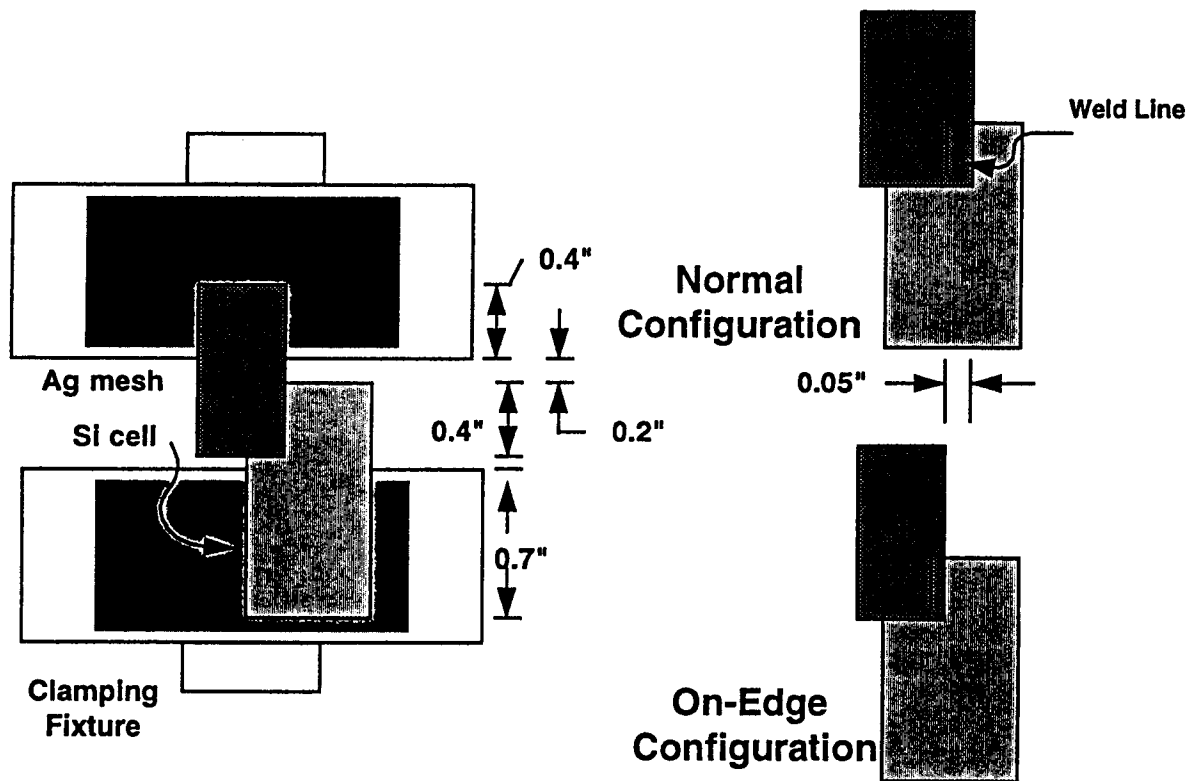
Schematics exhibiting typical sample set-up for mechanical fatigue testing.
